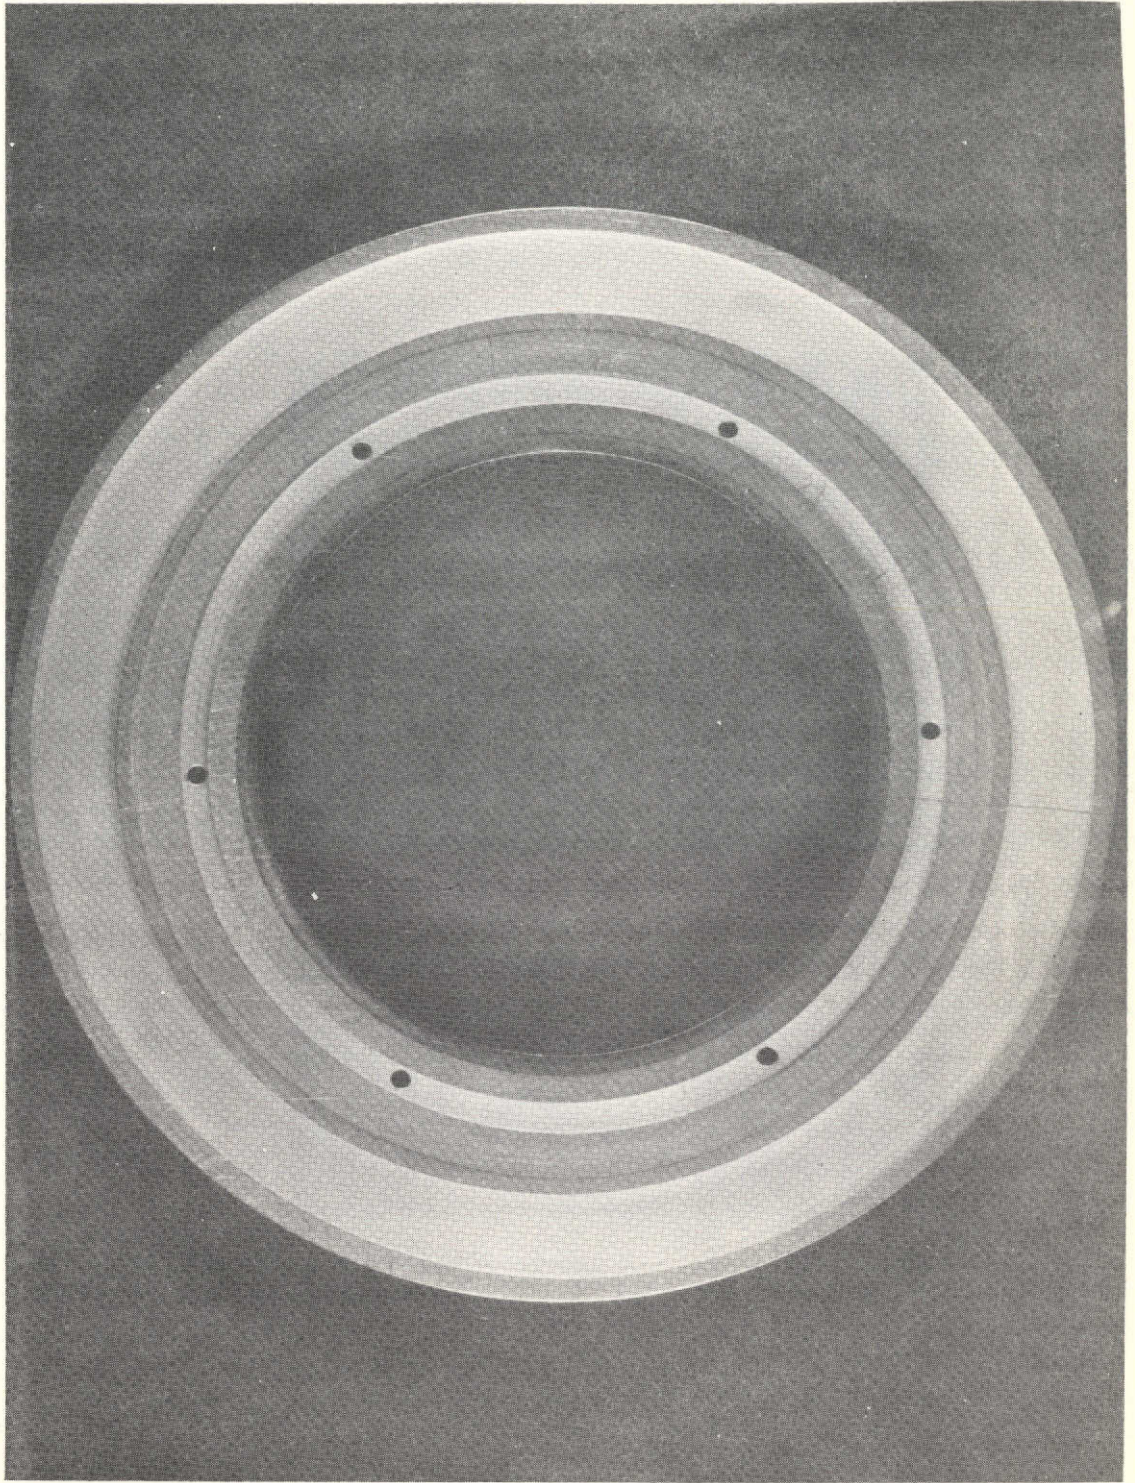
Cracked Oil Dam and Heat Shield, Seat Side.
